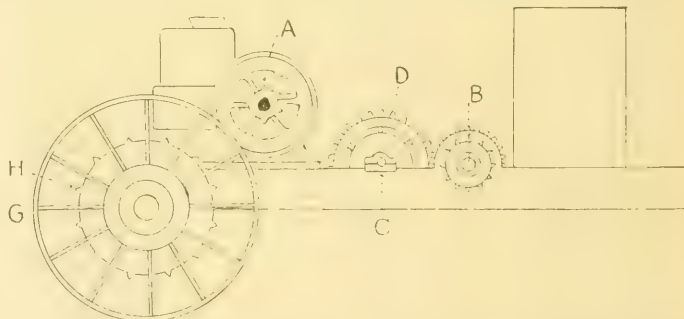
A, engine-shaft with 8-inch sprocket; B, counter-shaft with 24-inch sprocket and small gear-pinion at center of shaft; C, differential shaft with differential, D, between tractor-sills, and carrying small sprocket wheels (not shown in cut) at each end for belting to bull-sprocket H on the inside of drive-wheel G. Chain between A and B works just inside the chain from C to H between bull-drive chain and sill.
